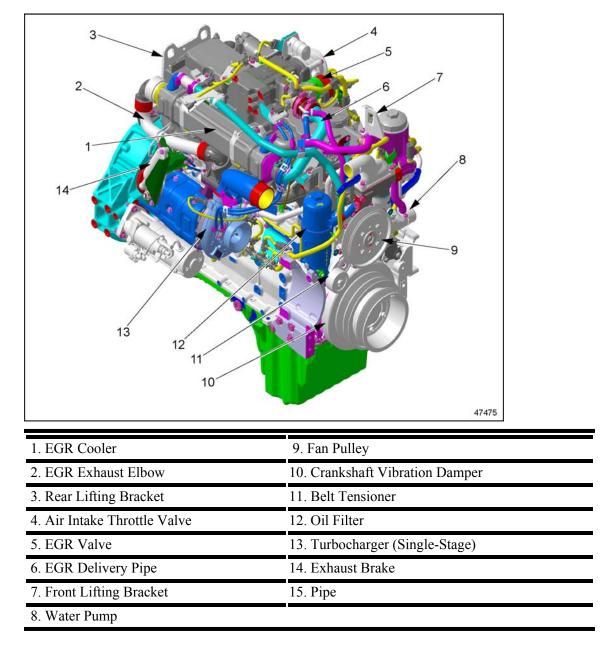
Right Side View of MBE 900 Engine (Single Stage Turbocharger) and Components
